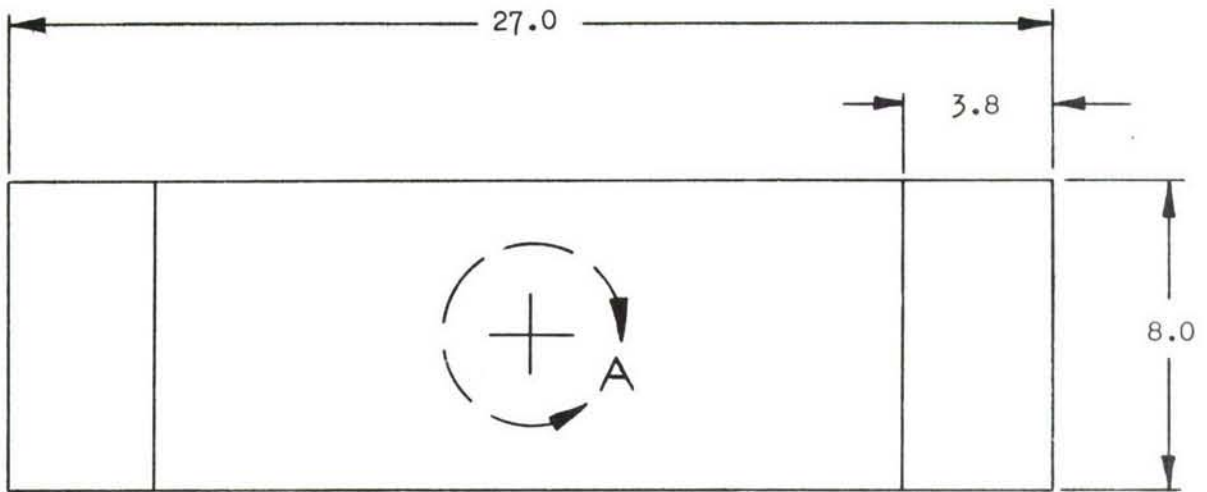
DAMAGE TOLERANCE WELDBONDED "A" STRINGER SPECIMEN
